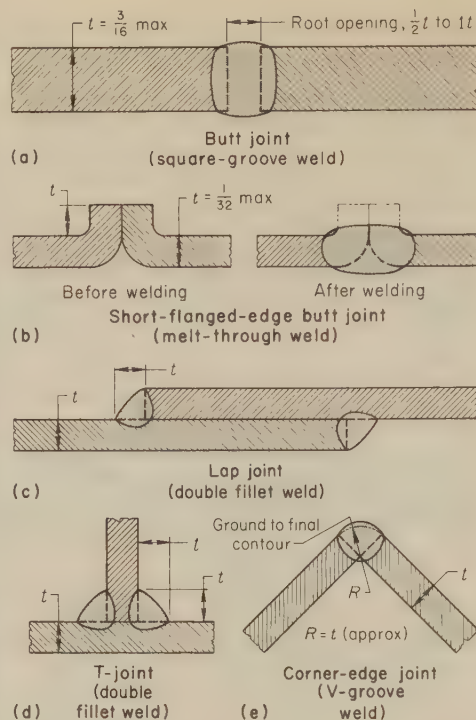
Typical joints and corresponding single-pass welds used in gas welding of thin sheet
